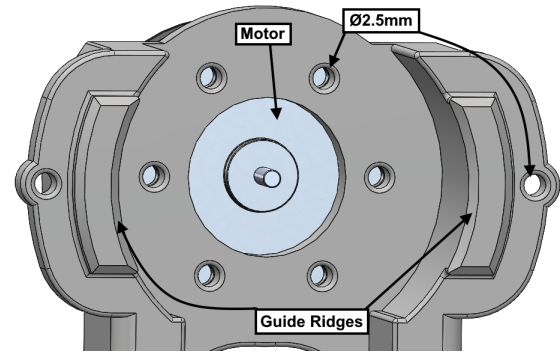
2.5 mm diameter holes for securing the motor using six M2.5 machine screws.
